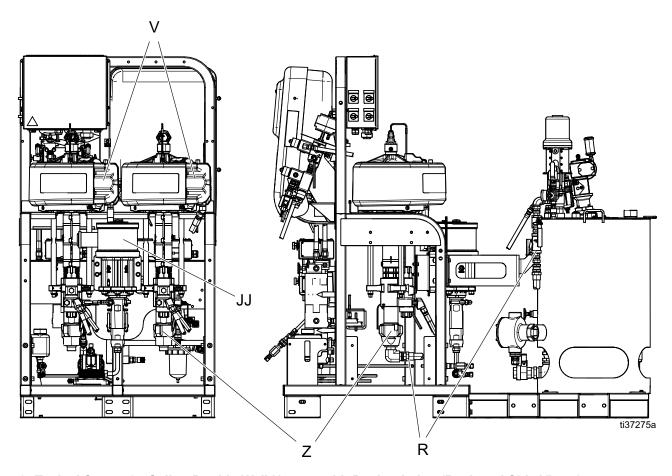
Typical Setup: 25 Gallon Double Wall Hopper with Recirculation (Back and Side Views)
